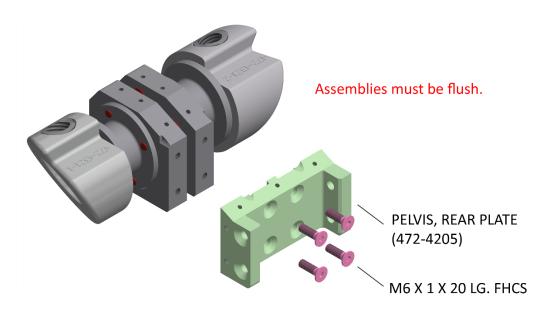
Left Socket Assembly Attached to Rear Plate
